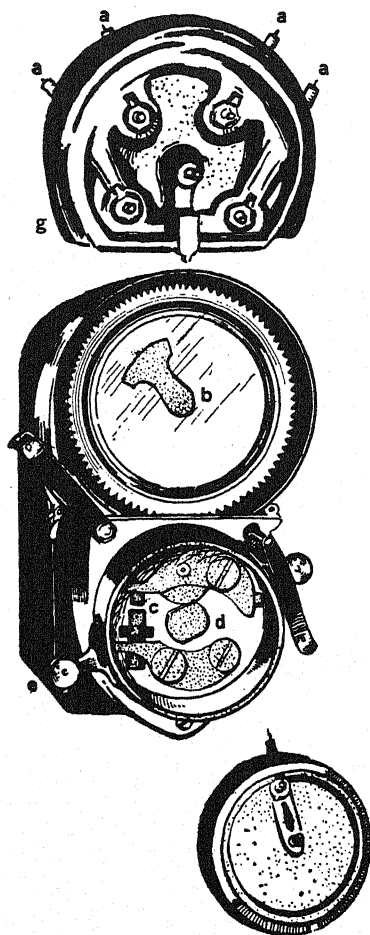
Front view of magneto (distributor head and breaker-box cover removed). *a*—Distributor terminals. *b*—Distributor rotor. *c*—Breaker points. *d*—Breaker-point cam. *e*—Spark-lever connection. *f*—Breaker-box cover. *g*—Distributor plate or cap.
